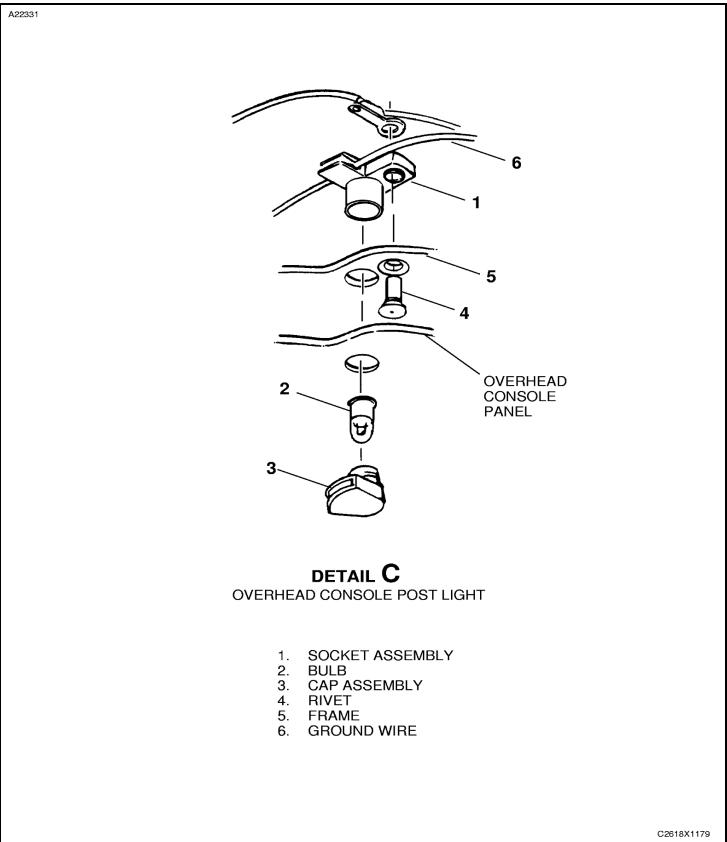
Sheet 2 : Overhead Console Lighting Installation
